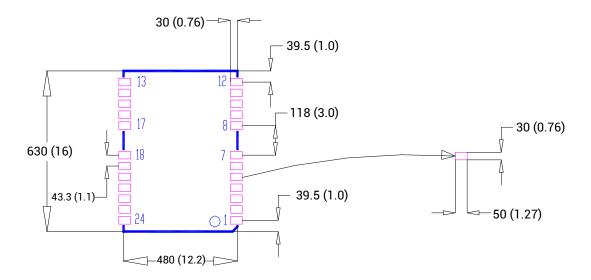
UM620 Series Modules Recommended PCB Packaging (unit: mil, in brackets: mm)
